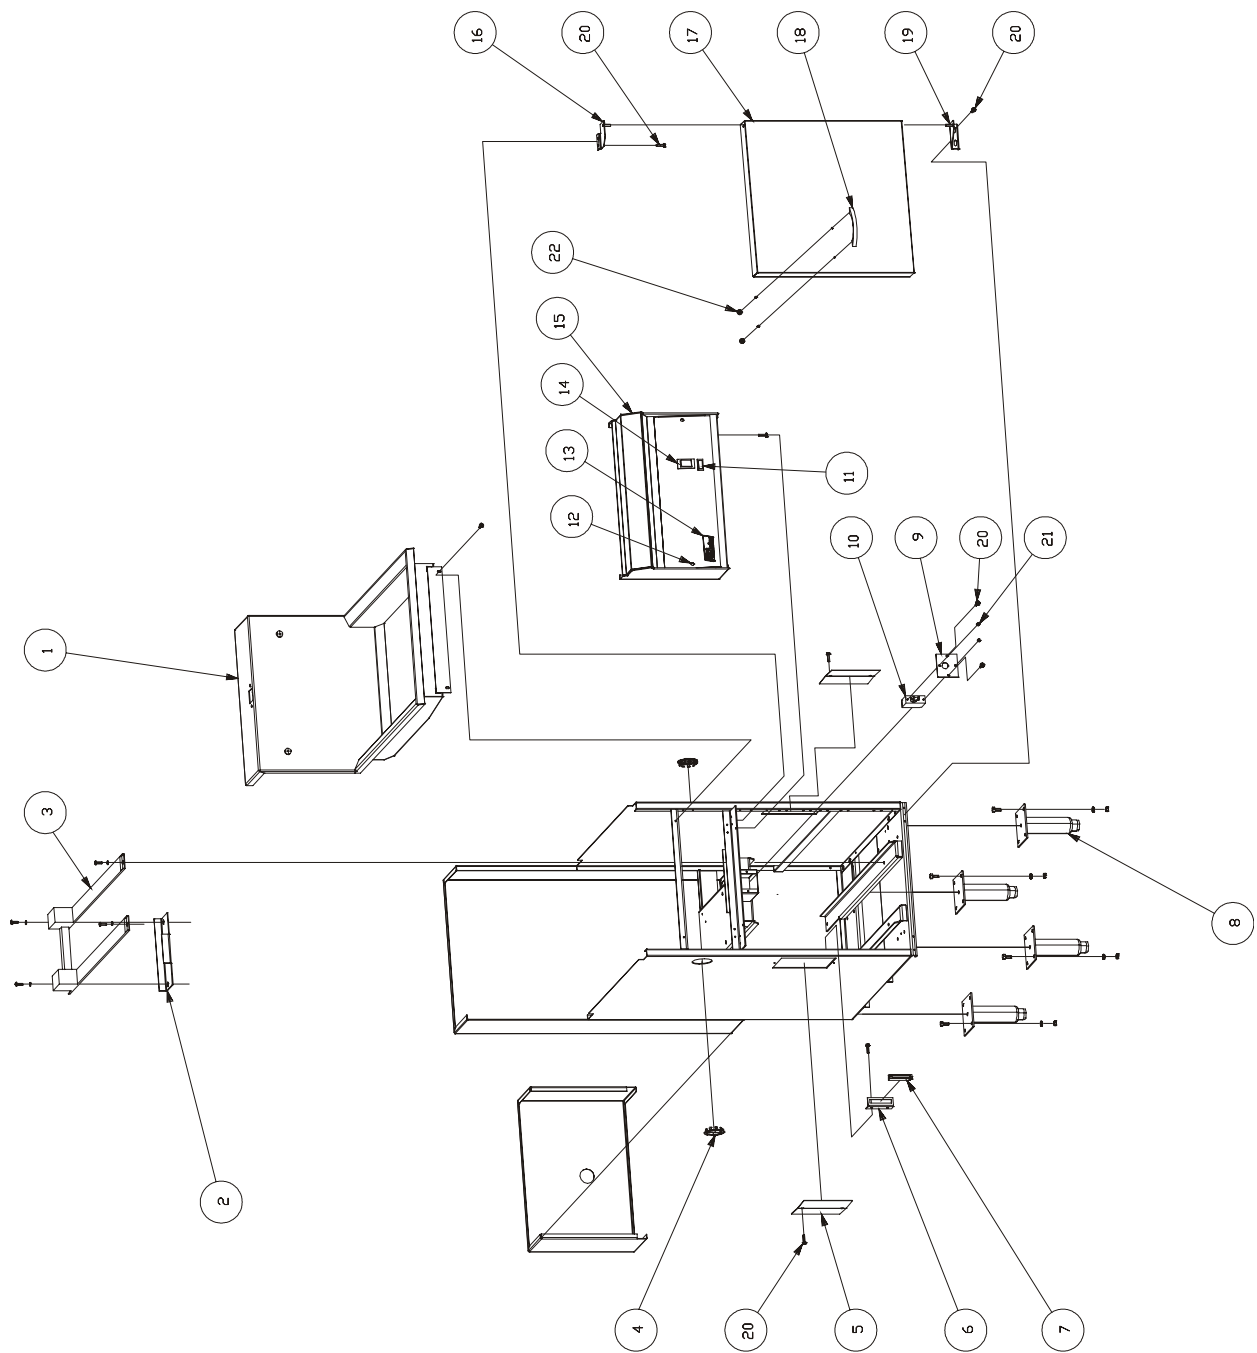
Frame-Cabinet / Electrical Assemblies With Components
